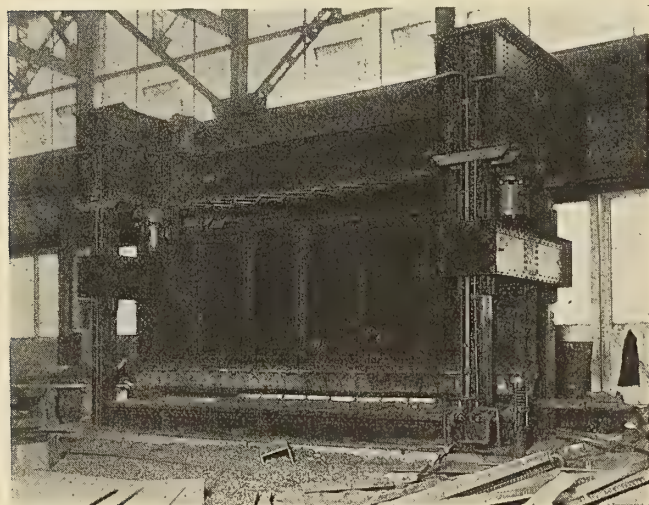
Keel-Bending Machine Built at the Yard for the Plate Shop
